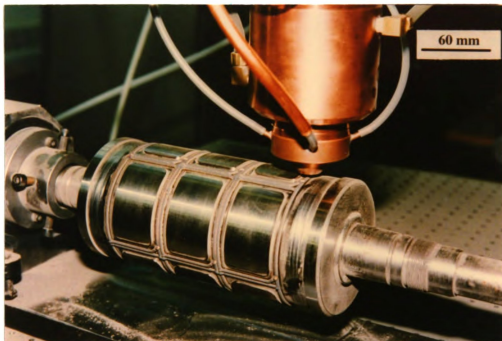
Hard-facing tracks, with complicated geometric patterns, deposited on a AISI 1045 steel roller via laser cladding (sample A).
